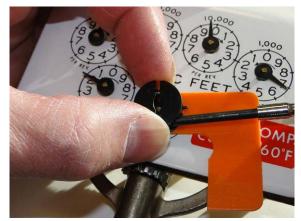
13. Insert 0.030 inch thick Shim and alternately tighten the Dial Wheel Screws to 3.5 inch-pounds (± 0.50 inch-pounds).
